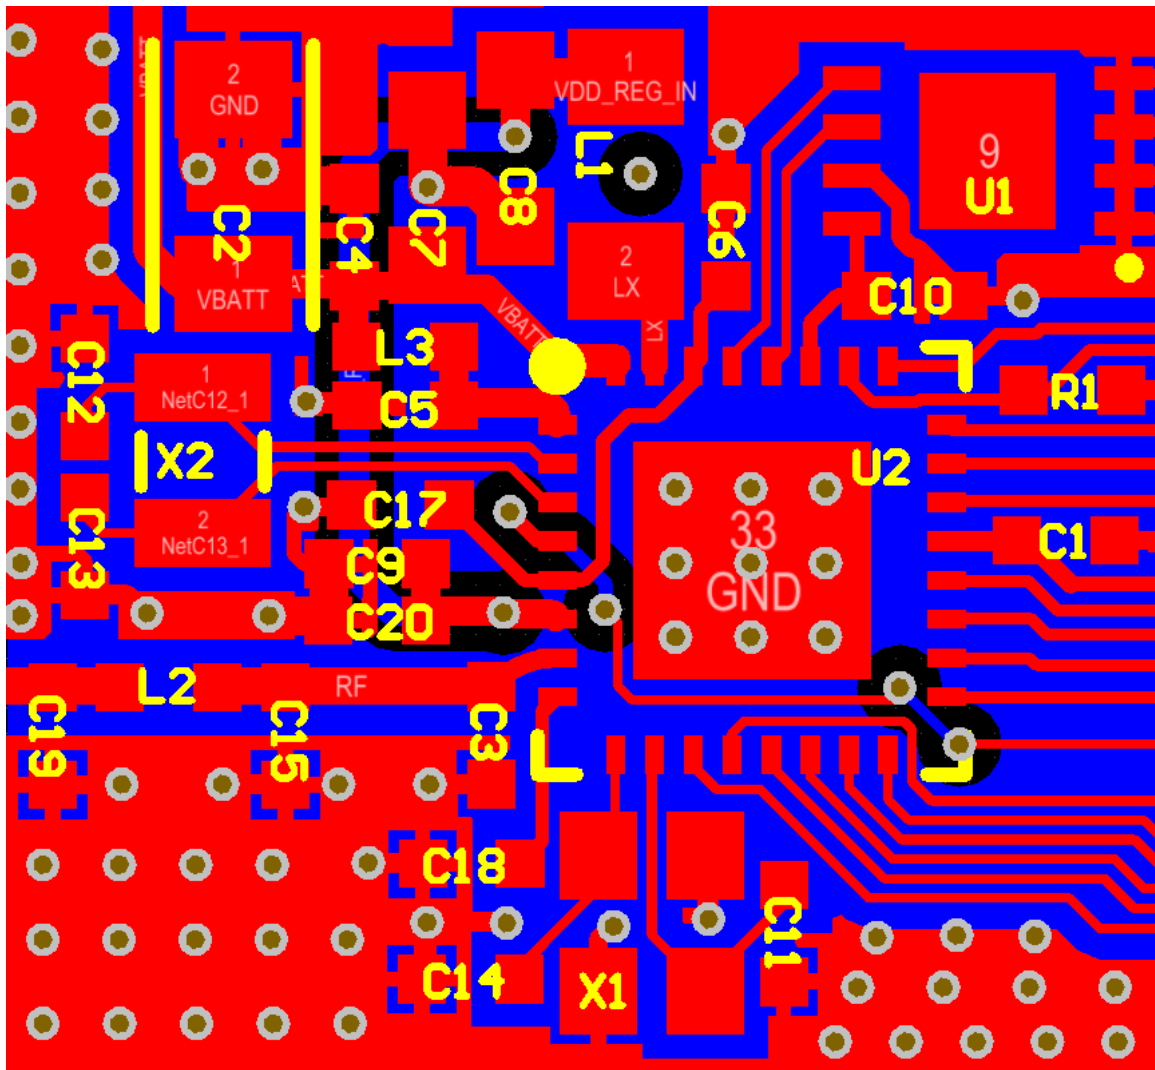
Recommended Layout with Two-Layer PCB (4.3V max.)
